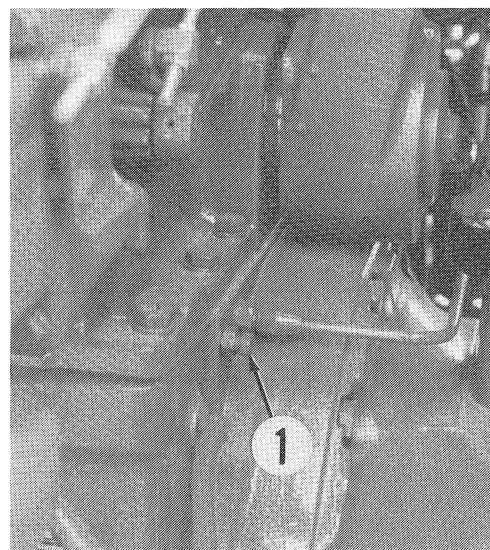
Brake bleed screws (1) are located in transmission housing at rear of final drive housings.
